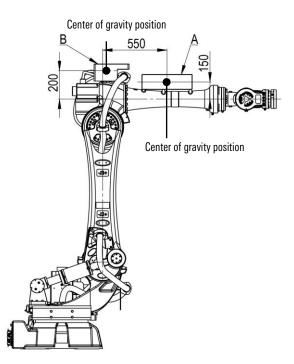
Installation dimension of elbow equipment of AIR165-2750A manipulator
